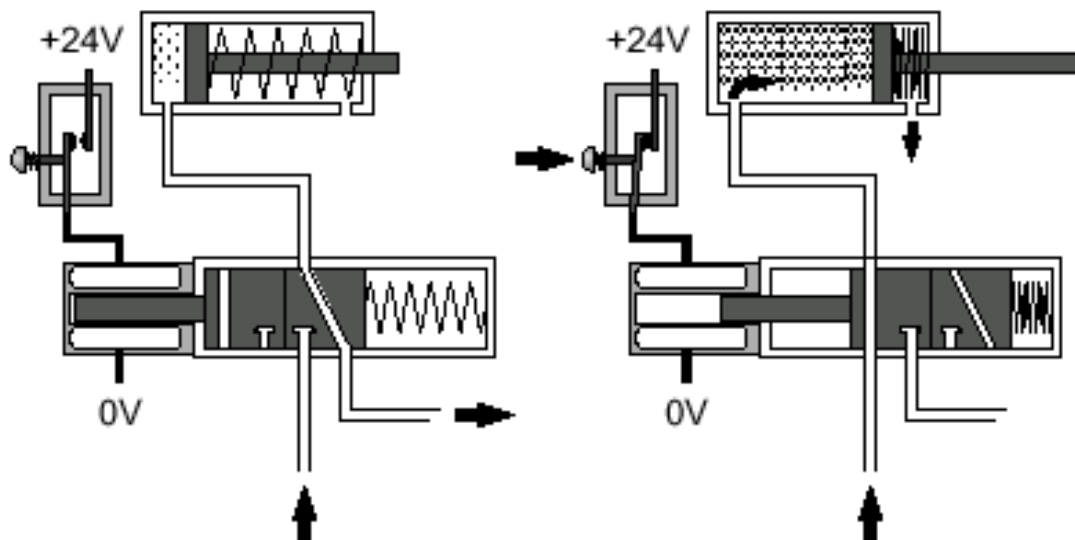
Actuation of a Single-Acting Cylinder using a 3/2-way Solenoid Operated Directional Control Valve
